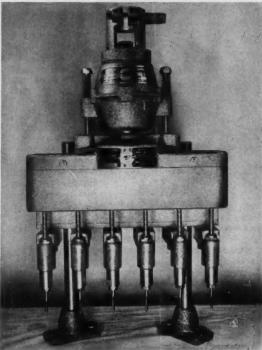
Ettco-Emrick straight-line flex-shaft multiple drilling and tapping head
